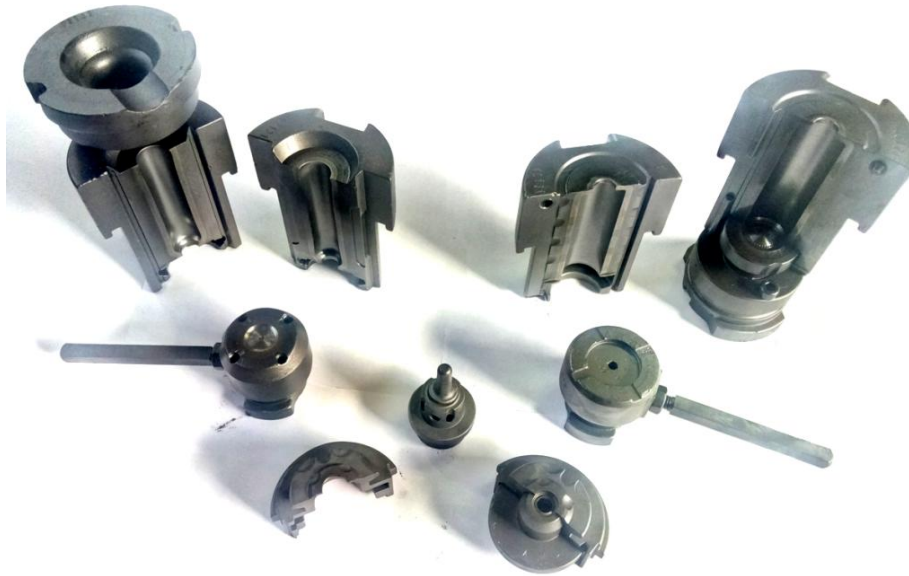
Mold equipment used for the manufacture of glass bottles through the blow and blow glass forming process: blank mold (left), neck ring mold (bottom) and blow mold (right).
